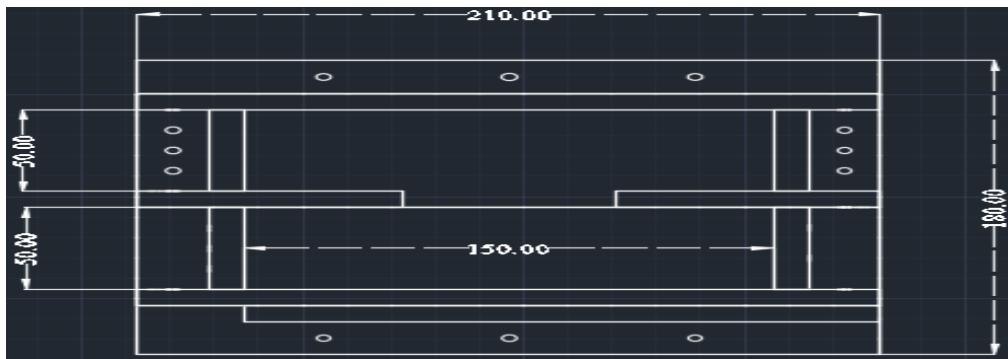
Shear Mold Dimensions (mm) – Taken from AutoCAD 2016
